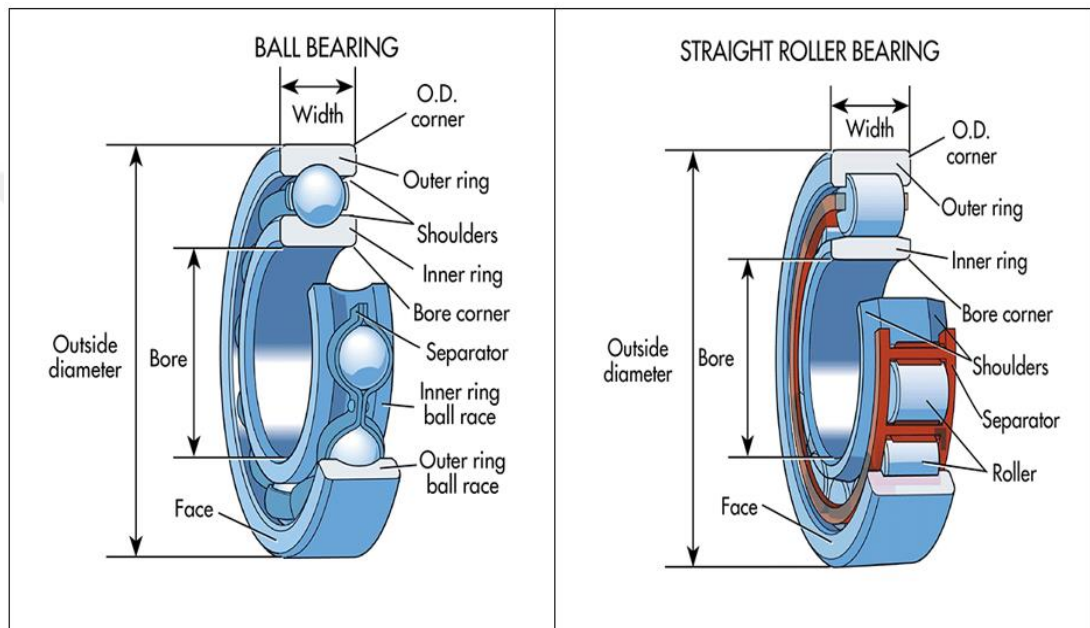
Structure of rolling-element bearing. a) ball bearing, b) roller bearing (Source: Machine Design, 2015).
